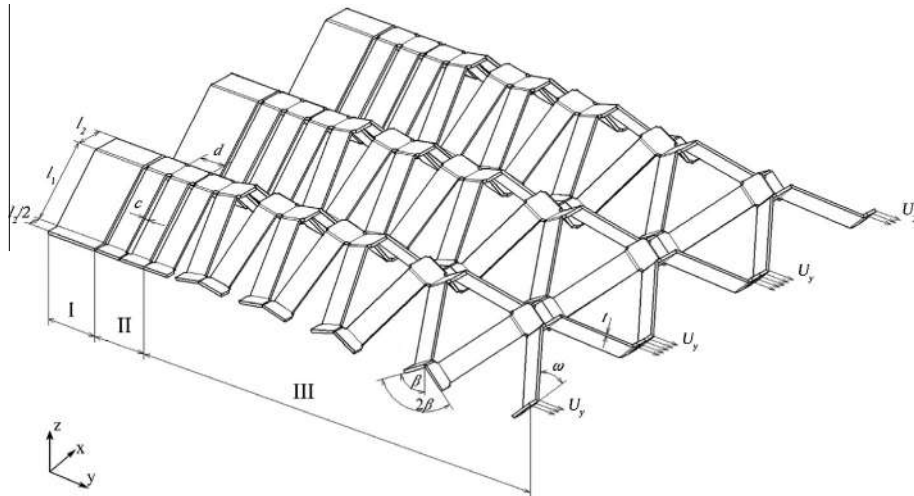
Three key steps in manufacturing the novel expanded lattice truss structure.
